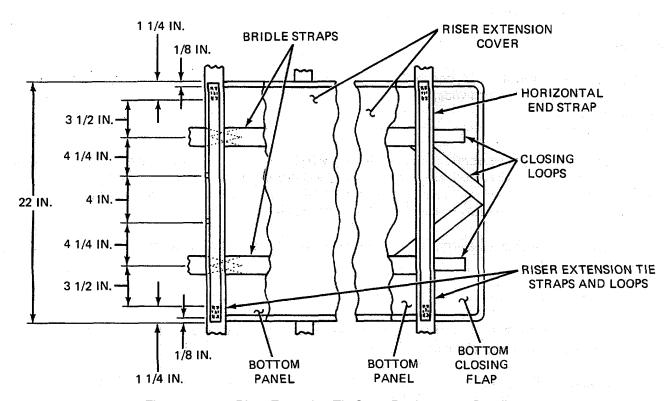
Riser Extension Tie Strap Replacement Details.
